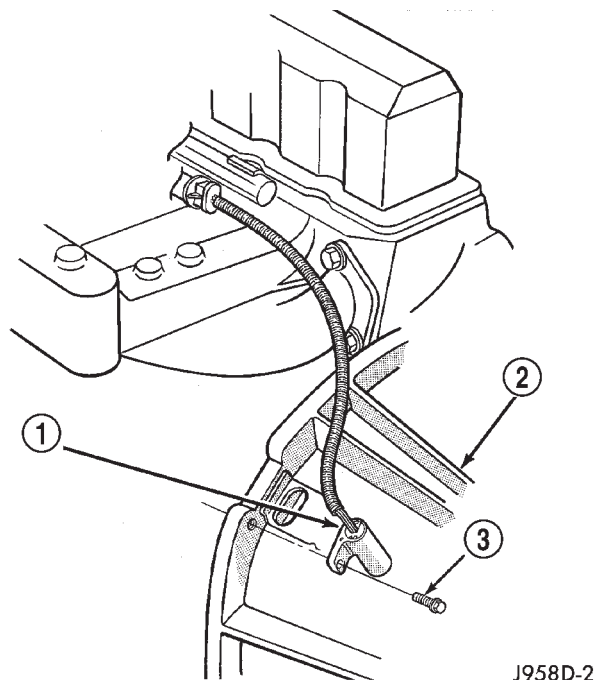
Crankshaft Position Sensor - 4.0L Engine
